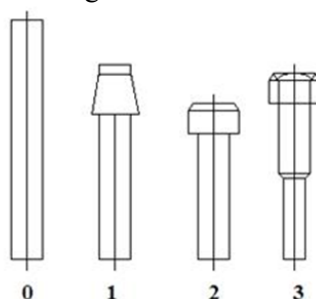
The sequence of processing the blank for manufacturing a bolt by stamping
